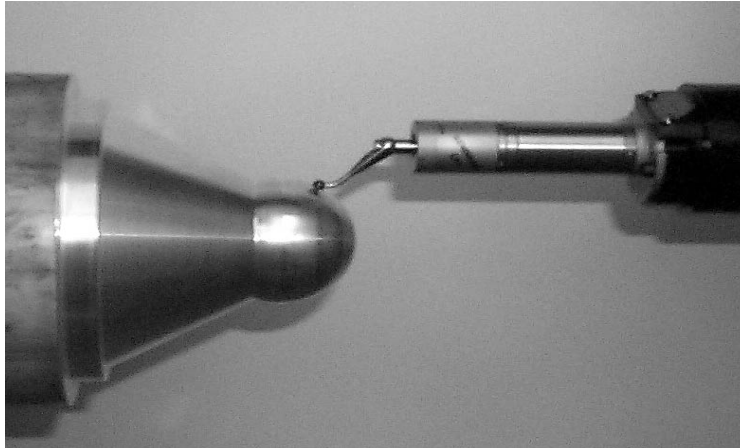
Fast Probing on a part, which checked machining errors on a Turning Center.
